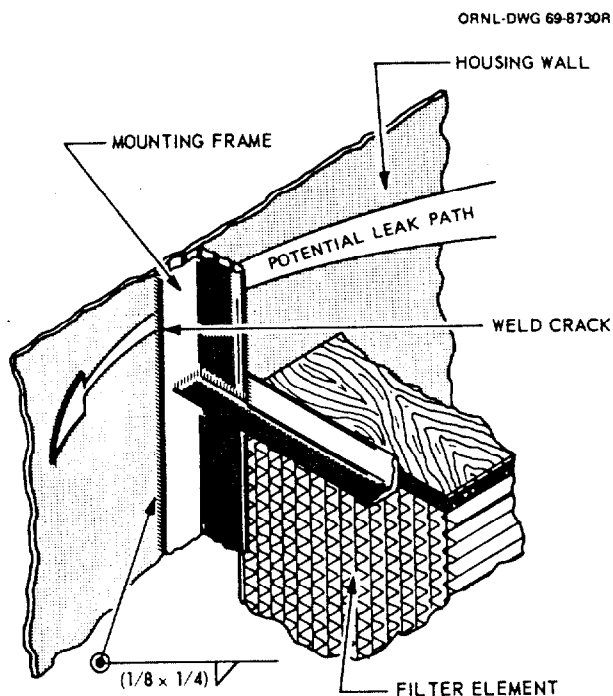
Acceptable method for seal-welding mounting frame to housing. Weld crack and leak path show how a fatigued weld could result in bypassing the filters.
